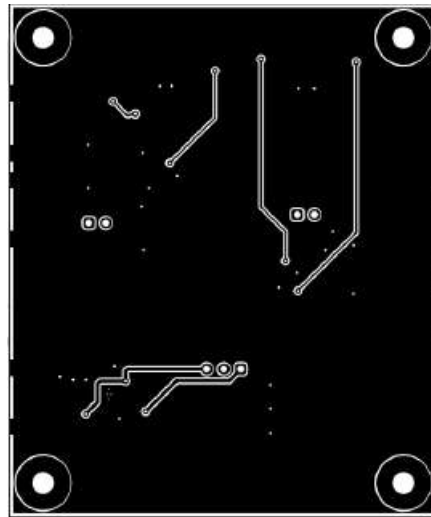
PCB Layout Example From LMK6 EVM - Bottom Layer
